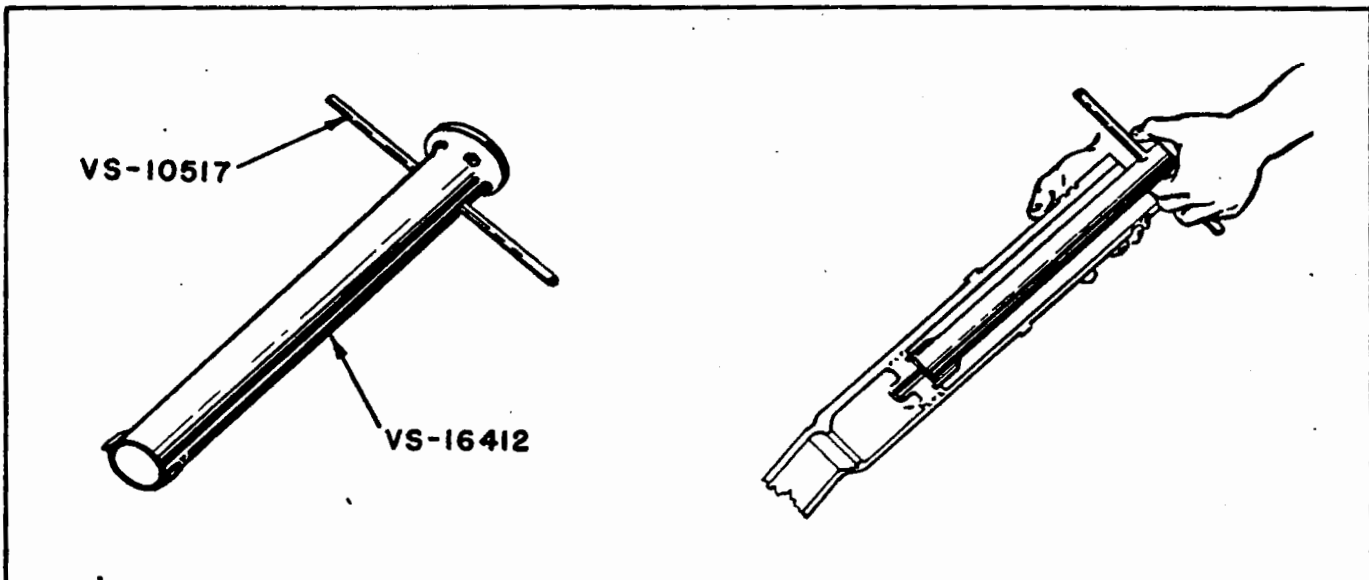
Wrench - Used for Removal of Metering Pin Retainer Nut from Main L.G. Shock Strut Piston.
